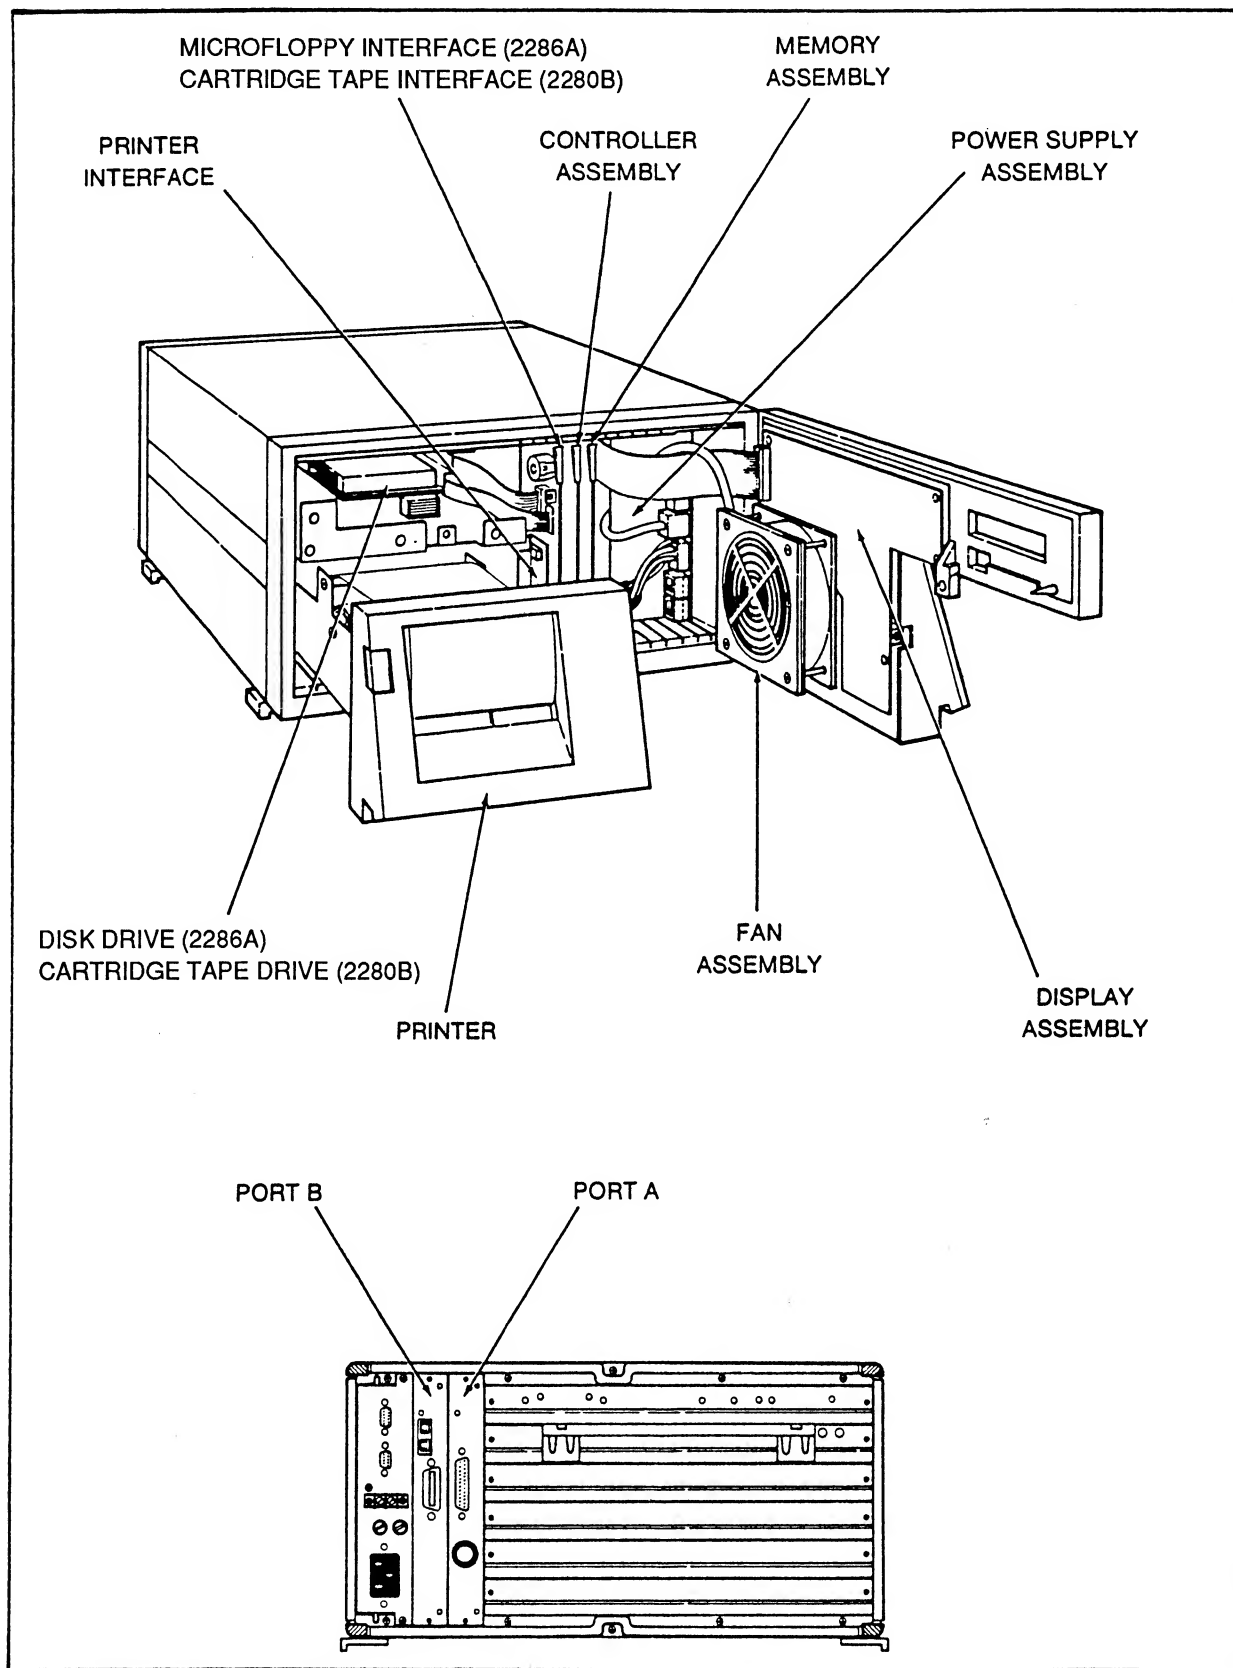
Major Assemblies on the Data Logger Chassis (2280 shown)
